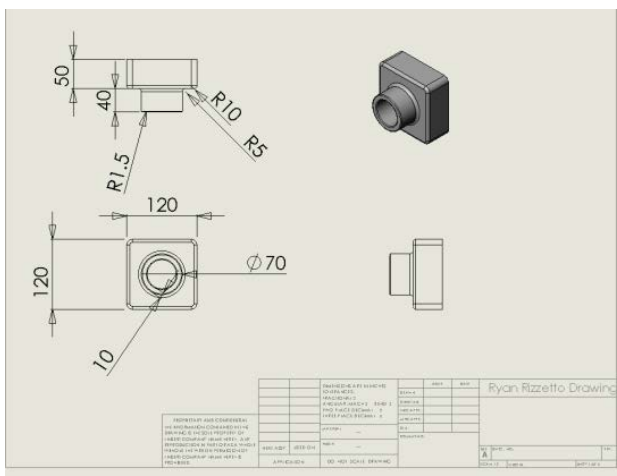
One of the last topics learned in CAD was dimensioning. In dimensioning, three views (top, front, and right) are displayed on a sheet, in which the dimensions of height, width, and depth are expressed in measurements. A final isometric view is displayed in the corner to show how the object would look three dimensionally, since all three views are in only two dimensions. The camera object was dimensioned in the picture on the left.
